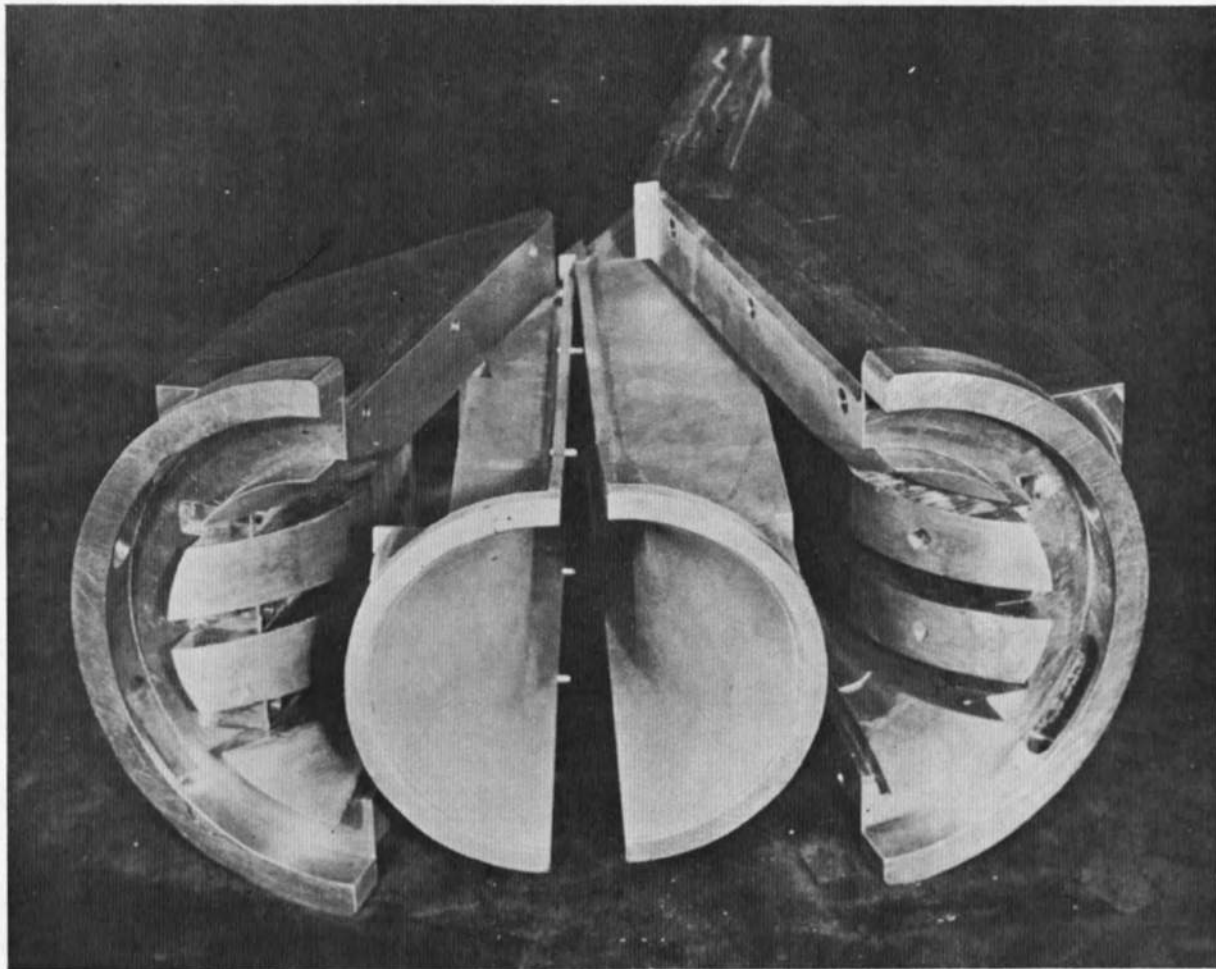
Supersonic Expansion Nozzle Before Welding
